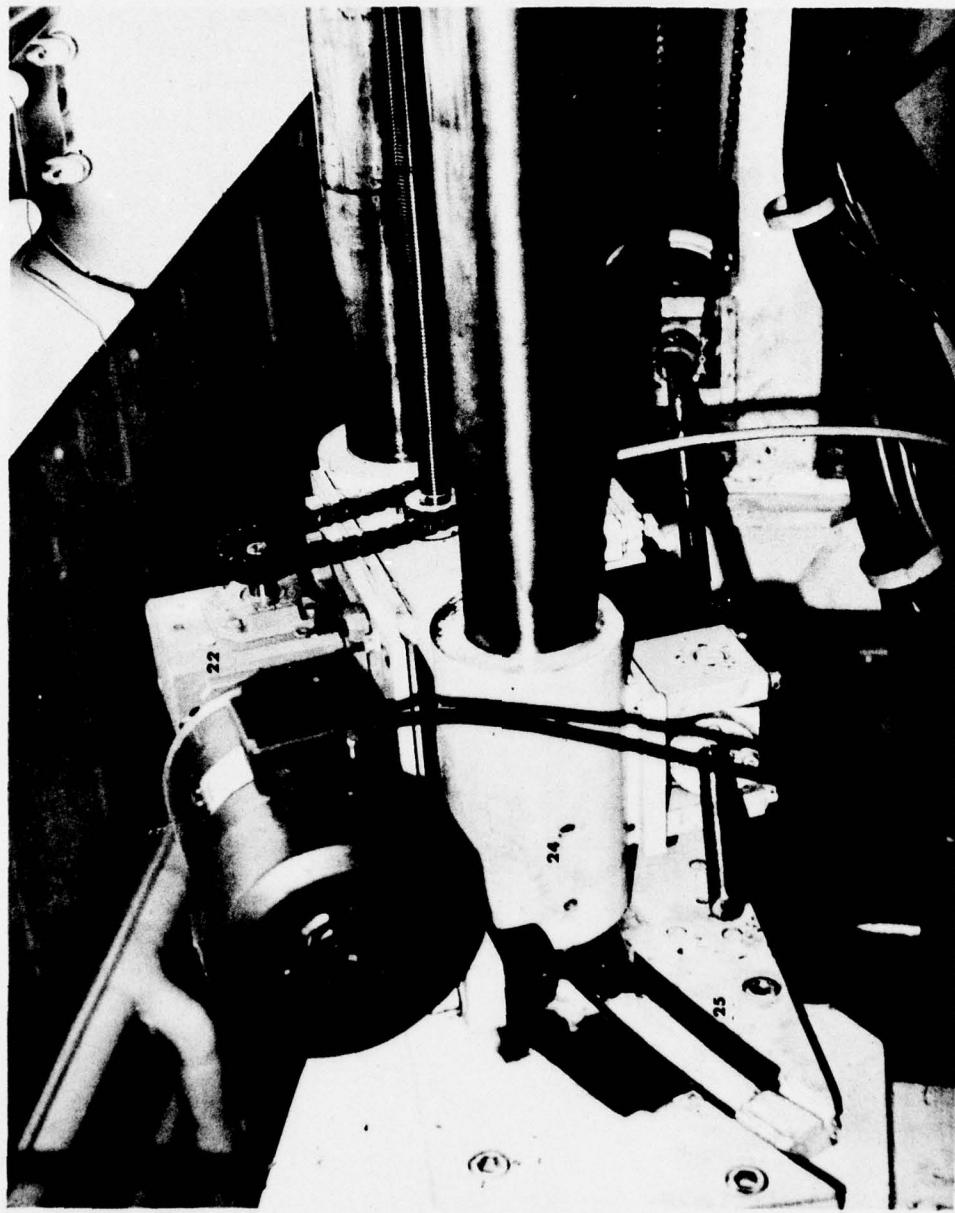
Power Drive Unit for Adjusting Torch Position Along Projectile Length and Manual Screw Drive for Torch Angle.
